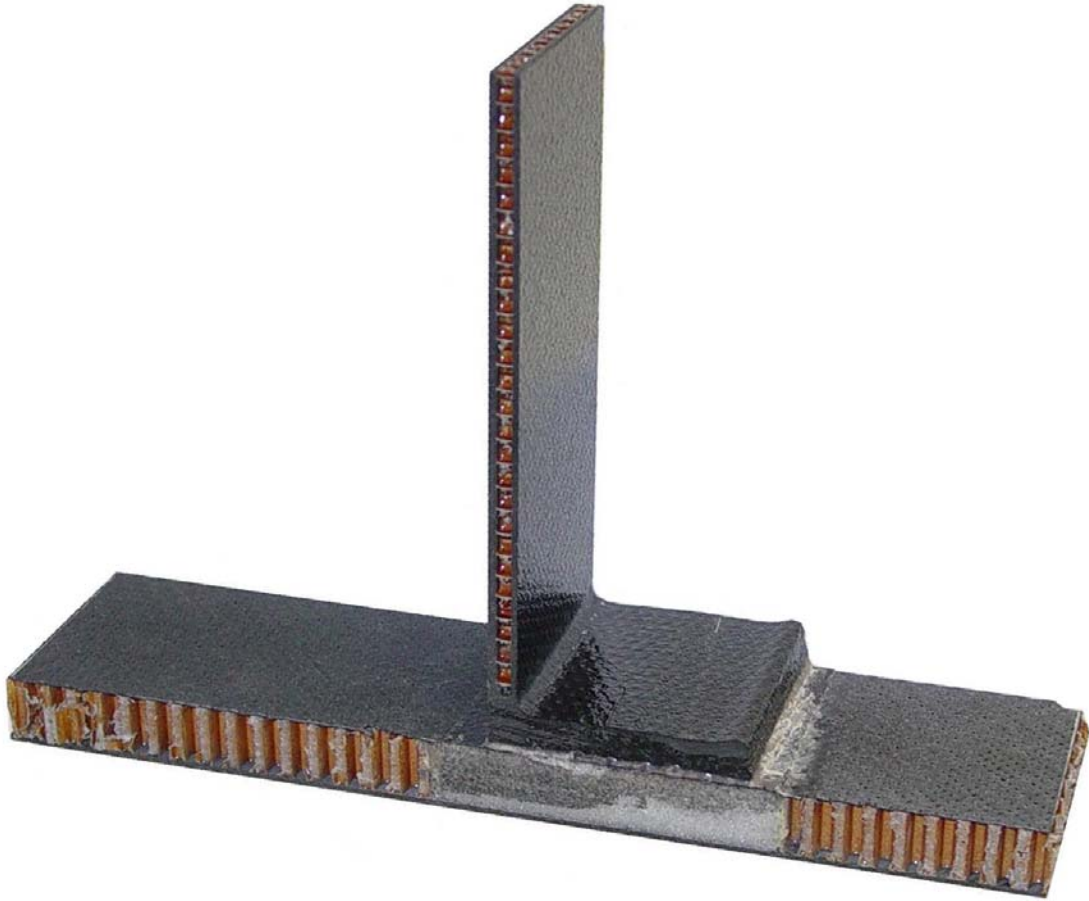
Example image of joint from Specimen Set 10 (pretest)
